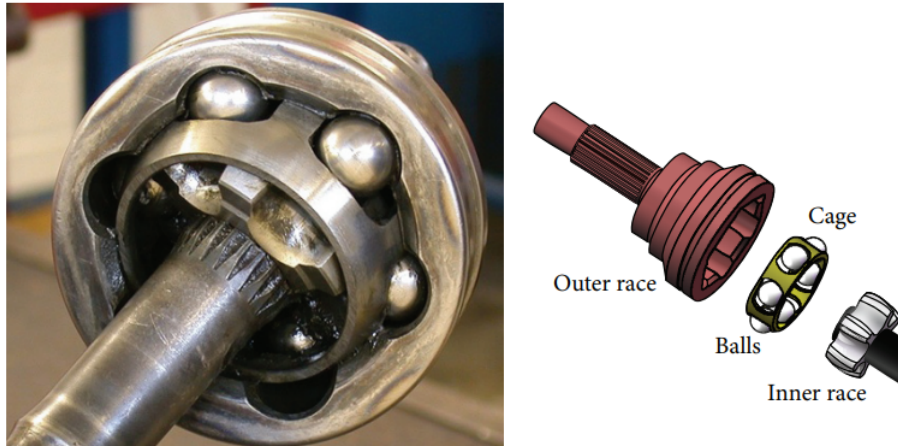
(Left) - Assembled view of the Rzeppa joint. (Right) - Exploded view of a Rzeppa joint. The inner race houses the ball bearings in grooves and the bearings are held in place by the cage².
